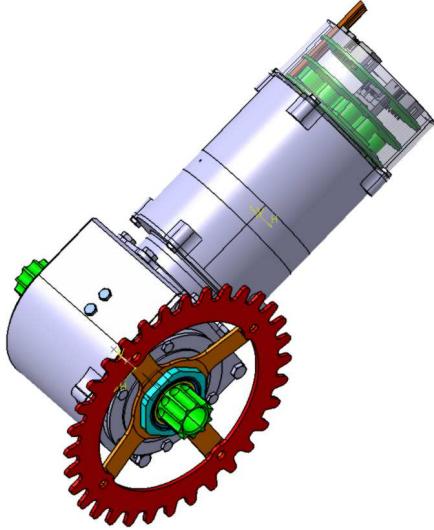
CAD model of the treadle axle with gearbox, electric machine and inverter
